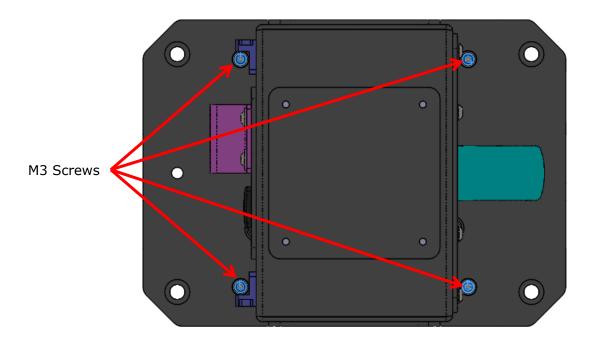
Location of M3 Captive Screws for Shipping Cap Fastening (highlighted in blue)
